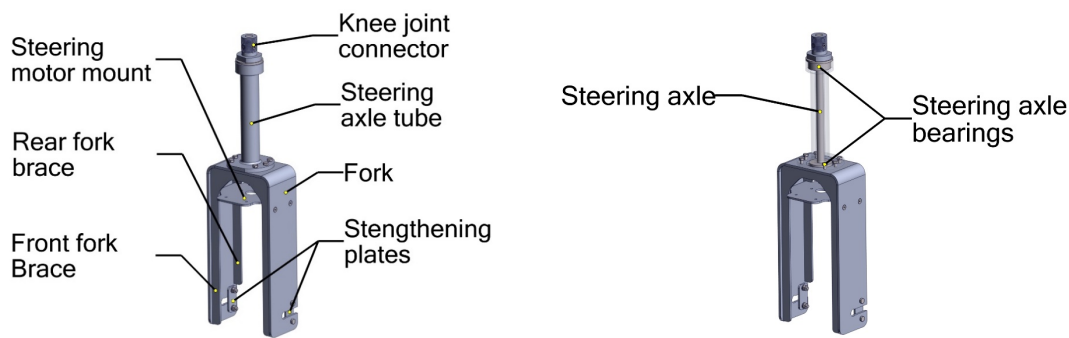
Parts of the Tibia link. (Render from SolidWorks Composer).
